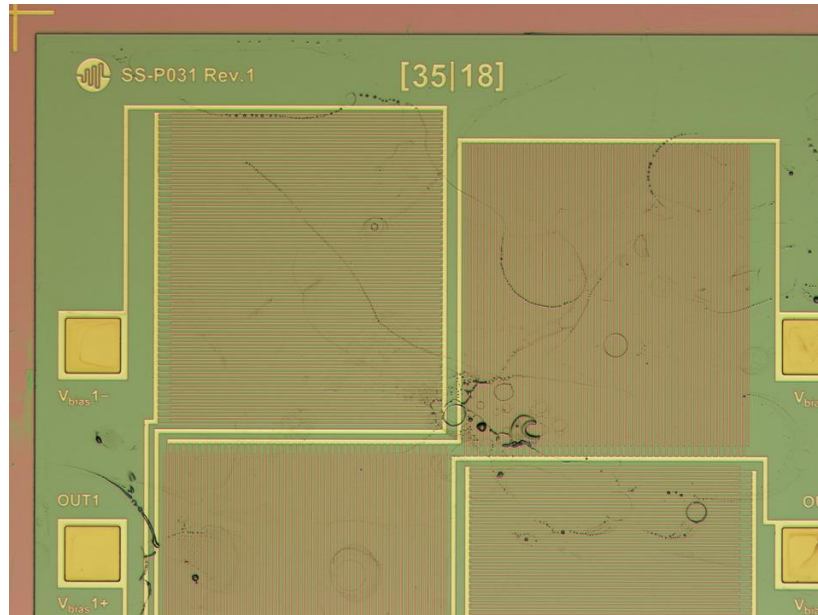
SU-8 Surface defects caused by improper DI water rinse instead of IPA rinse.
